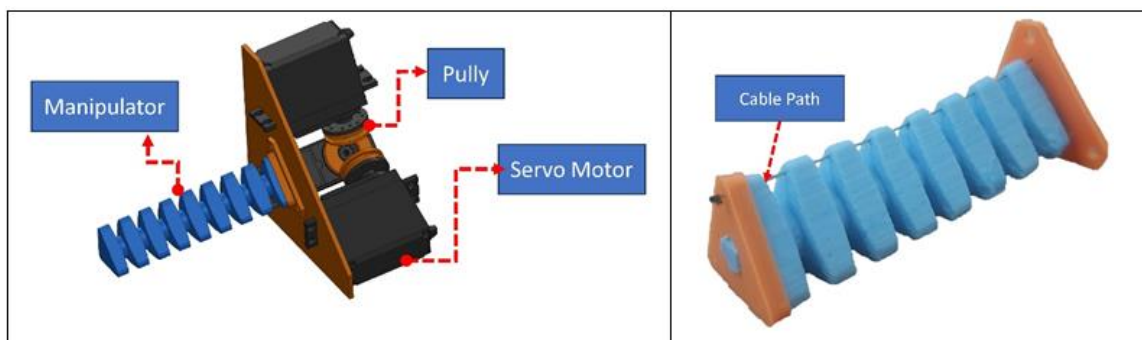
Proposed Manipulator Design (a) CAD Manipulator with motors setup (b) Fabricated Manipulator Prototype with Cable Path
